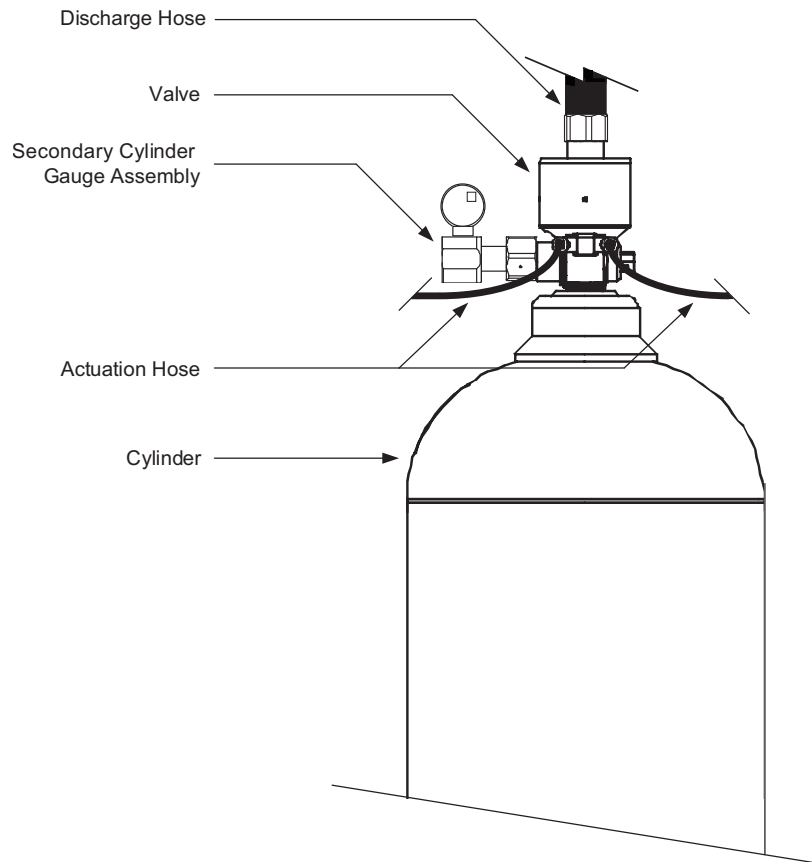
Typical Secondary Cylinder/Valve Assembly (Rear View)
